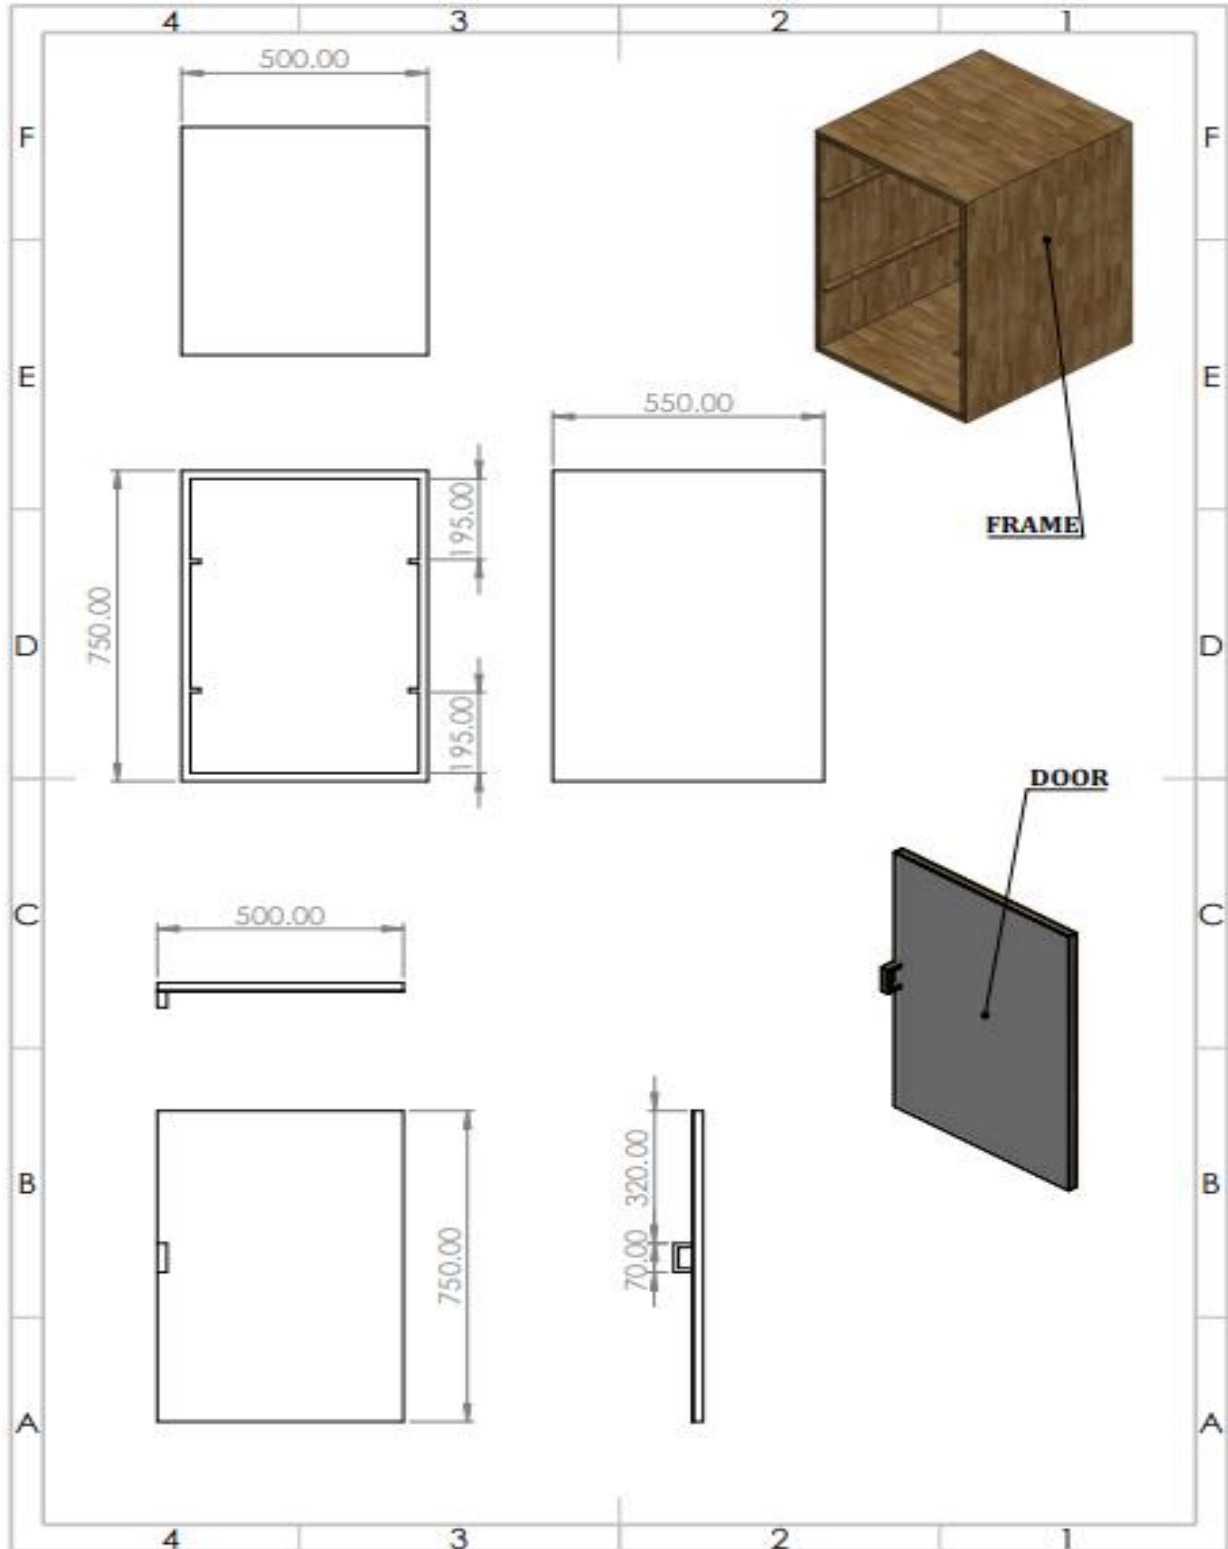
3: Detailed dimensions of parts 1 & 3 in 2D & 3D views
